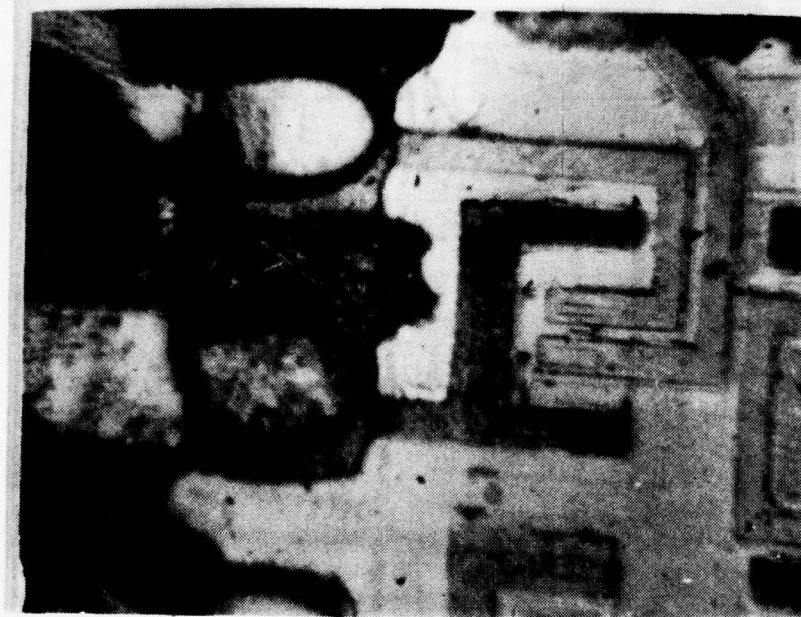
Copper shorting mechanism for epoxy molding compound.
